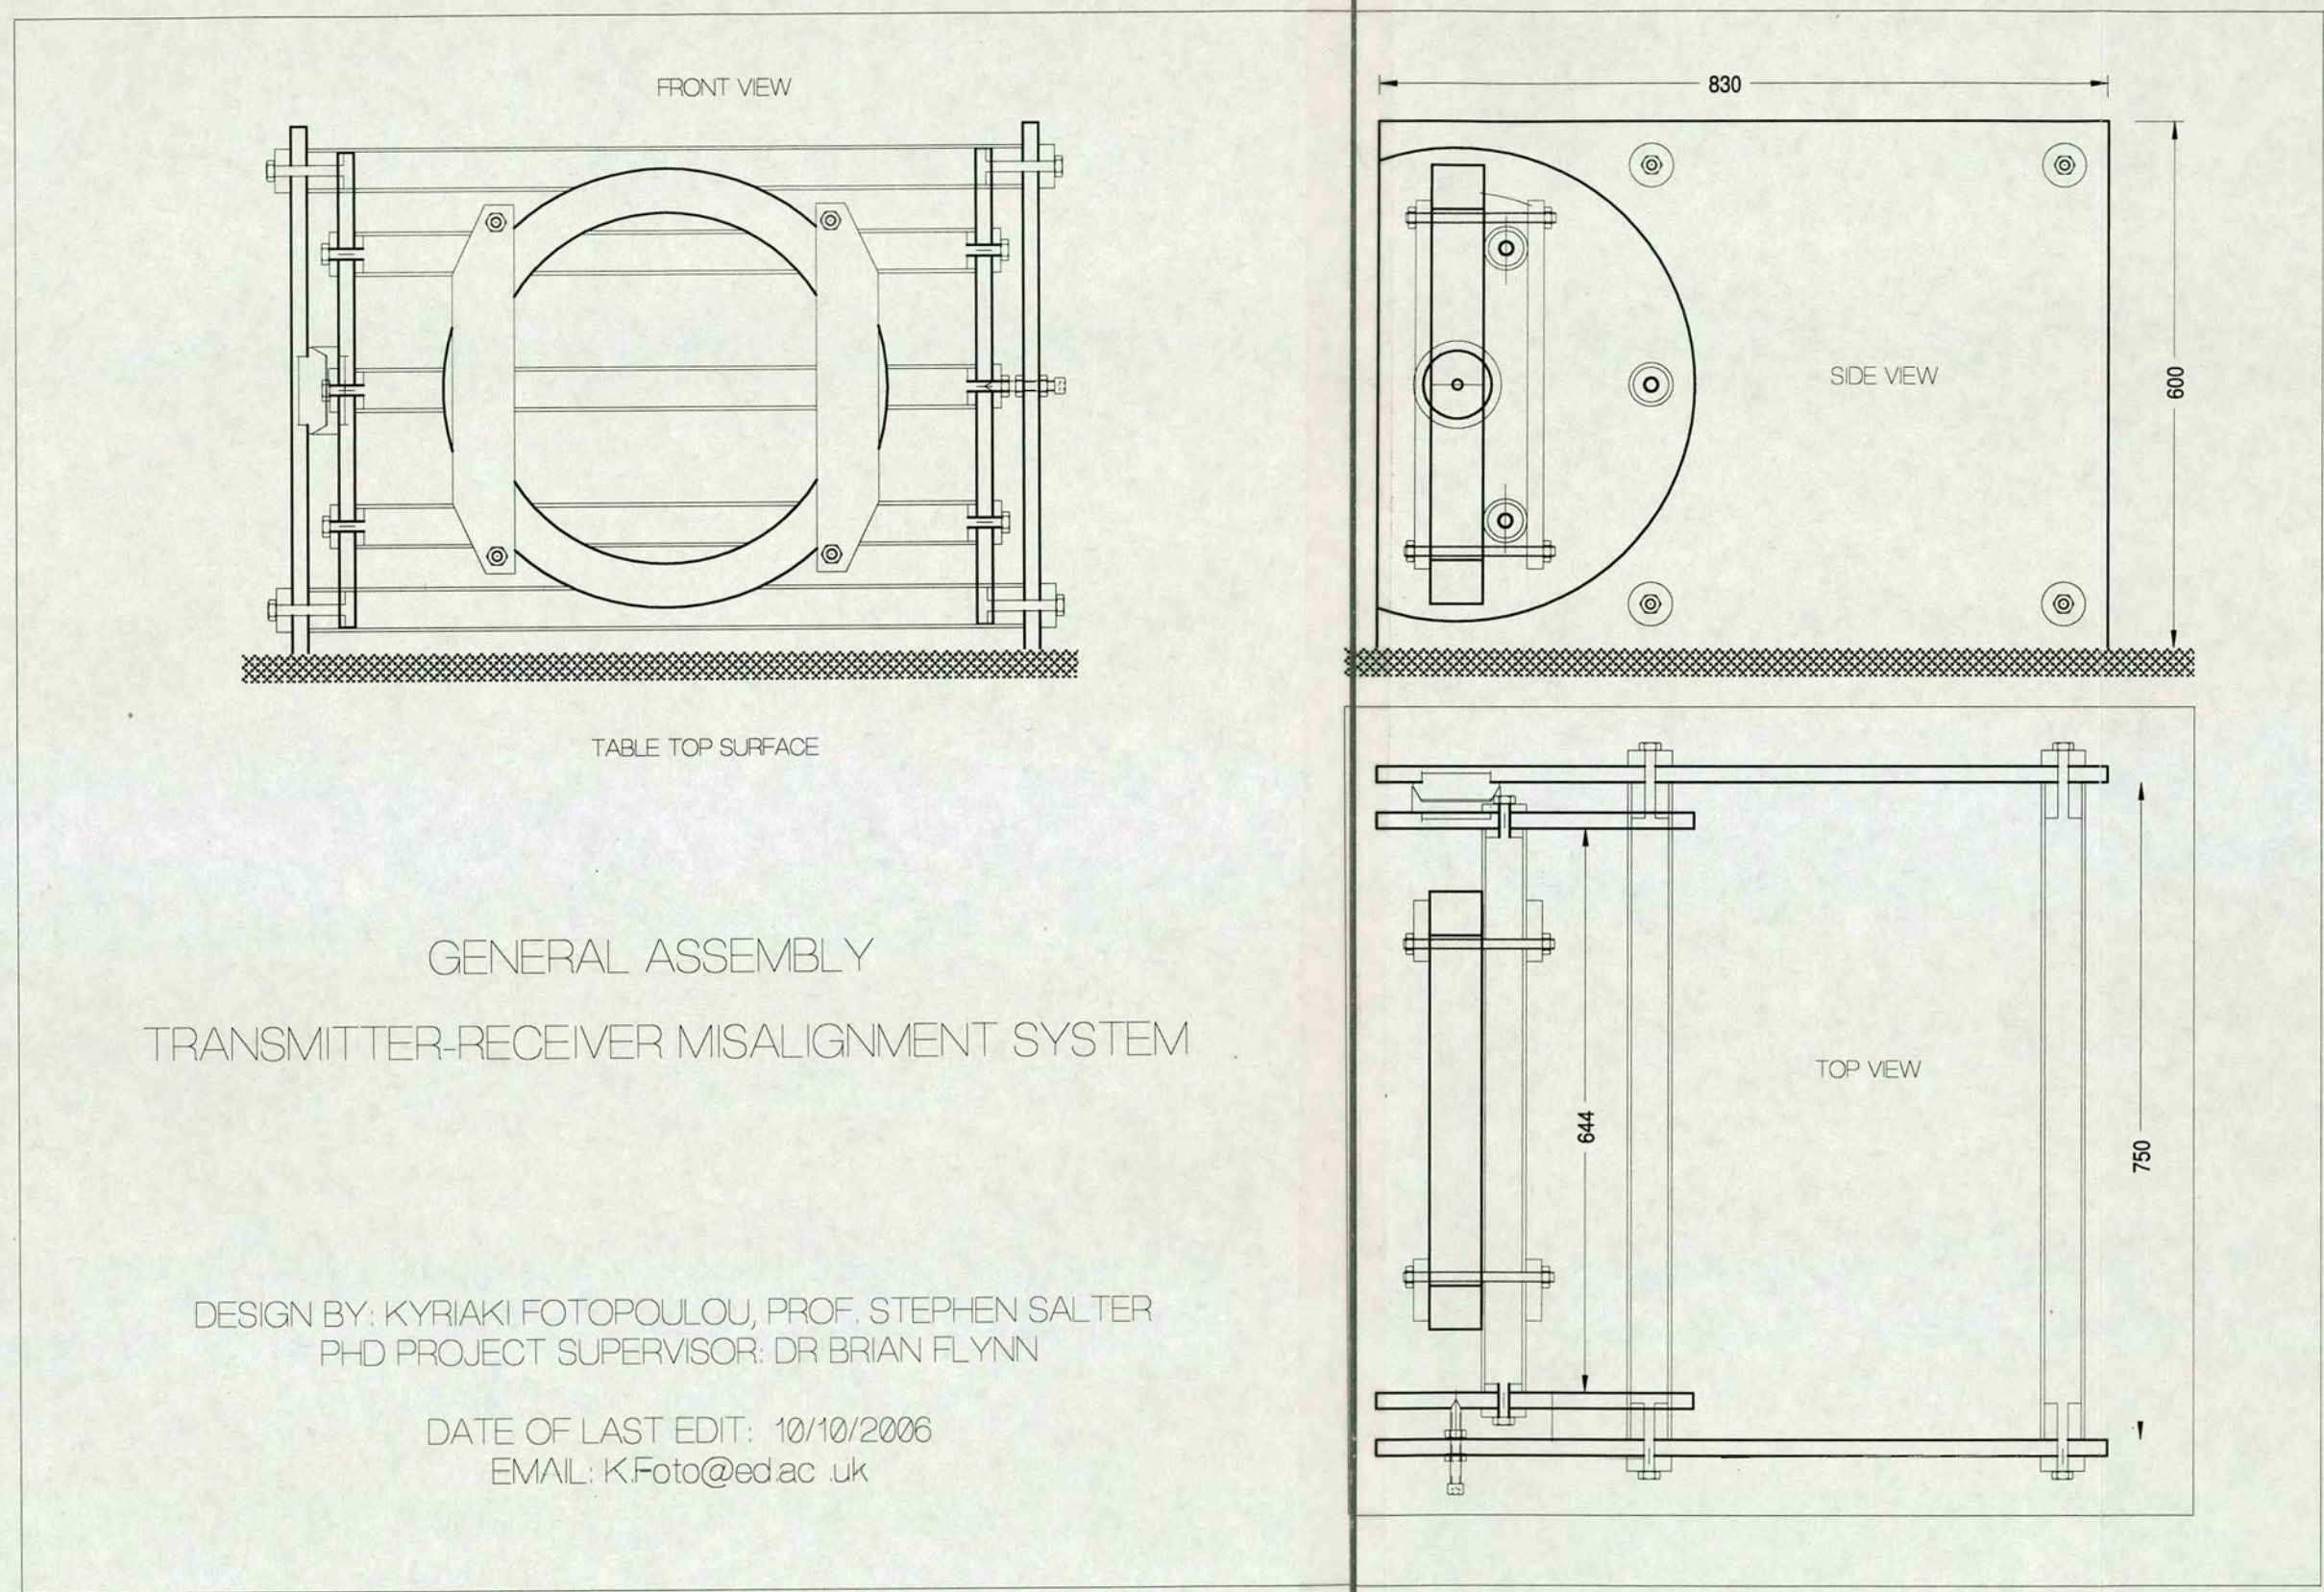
Mechanical drawing of the general assembly of the misalignment apparatus.
